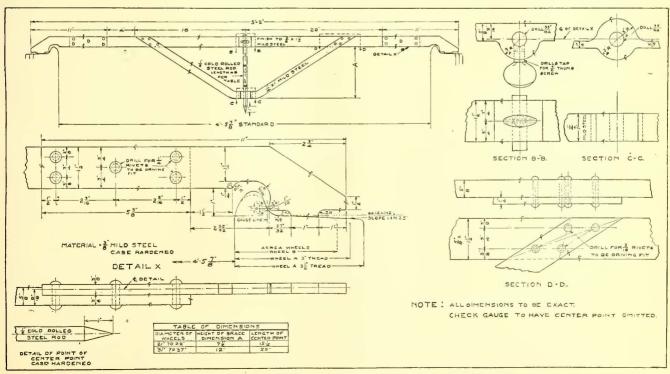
WHEEL MOUNTING AND CHECK GAGE
